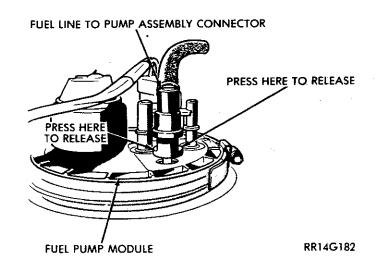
Fuel Tube to Fuel Pump Module Connection
